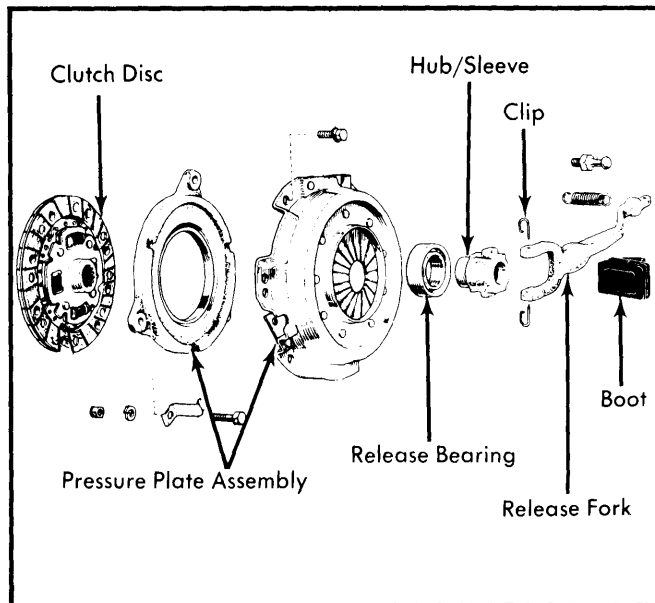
Exploded View of Typical Clutch Arrangement. Pressure Plate Assembly and Hub/Sleeve Retainer Springs May Vary Between Models.
